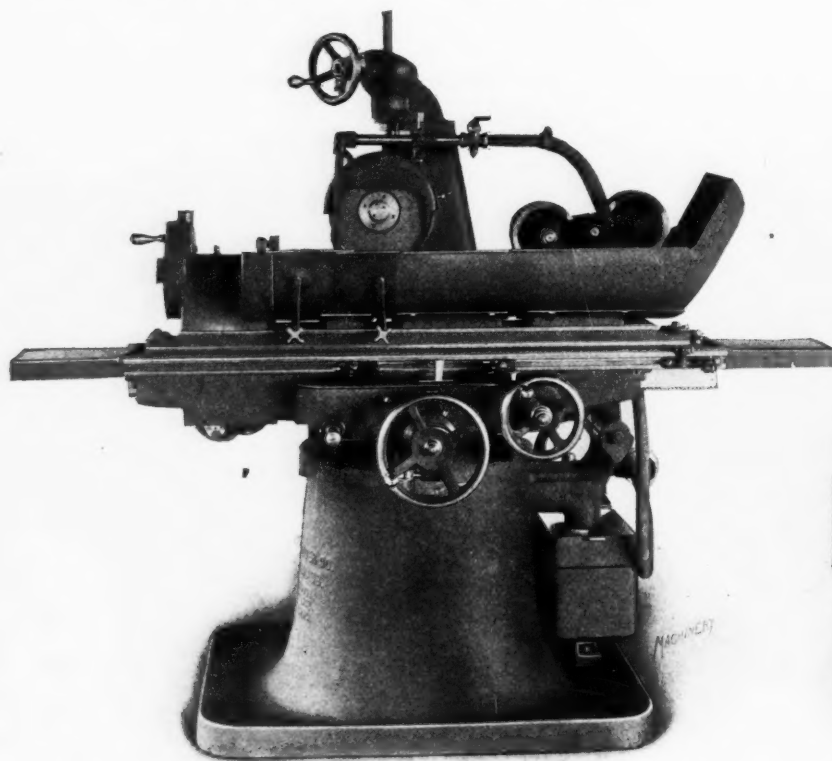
Bath Multiple Key-shaft Grinding Machine
